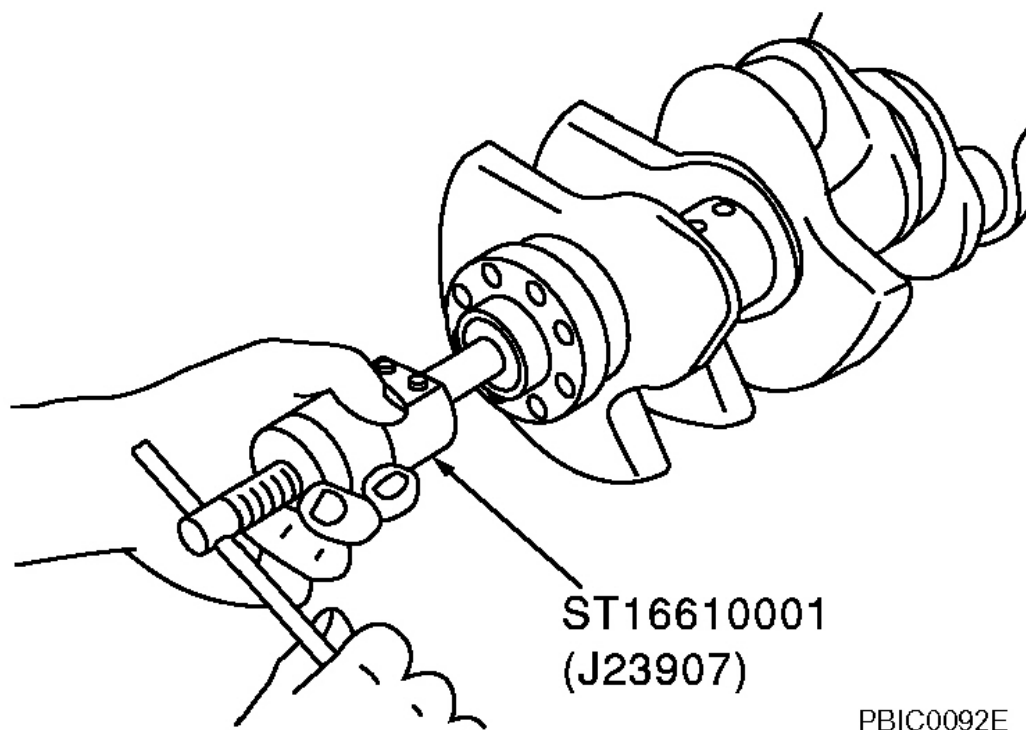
Removing Pilot Converter Without Hoisting Engine With Engine Stand
